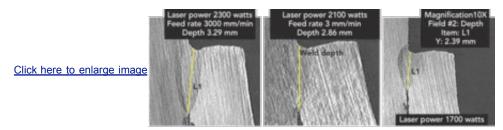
Cross section samples of three welds at various laser power settings: 2300-watt full penetration weld on seam, 2100-watt full penetration, and 1700-watt welds.
